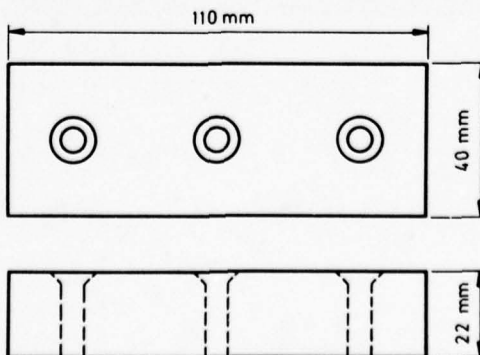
Aluminium alloy blocks for corrosion tests with bolts. Holes up to 100 μ m oversize on bolt shanks
